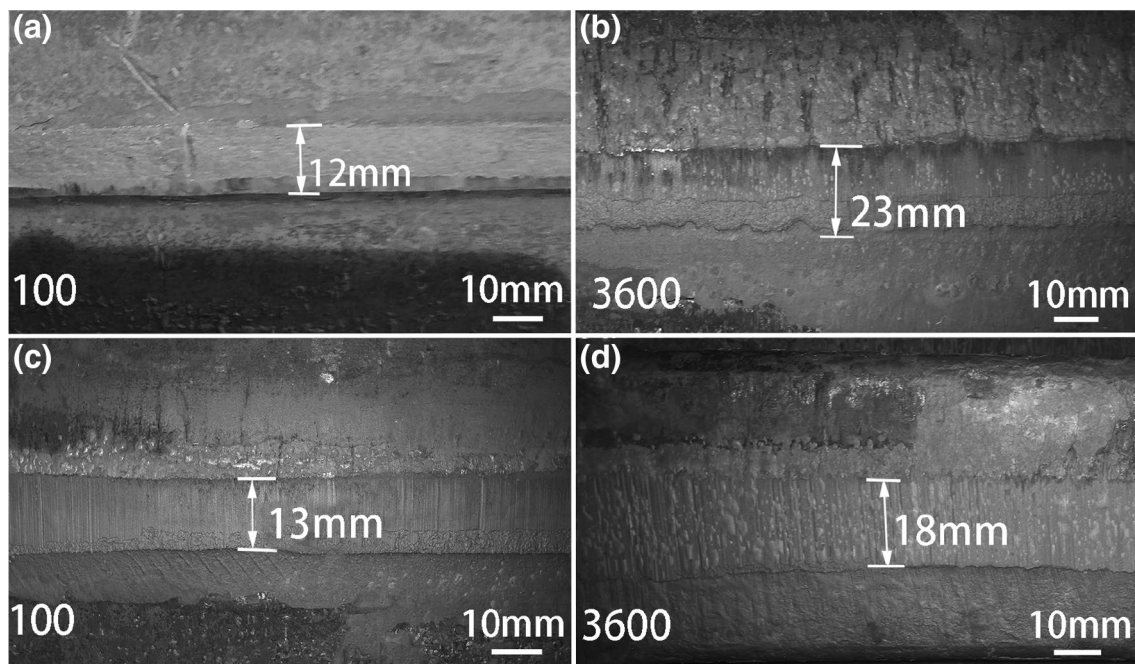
Development trend of cut edge width on straight forging pieces. a, b Untreated mold; c, d laser melting mold
